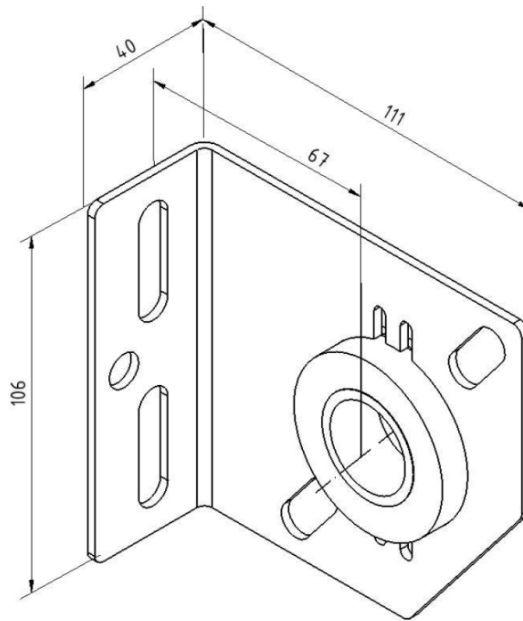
Bearing plate for smaller wire drums than 67mm radius
